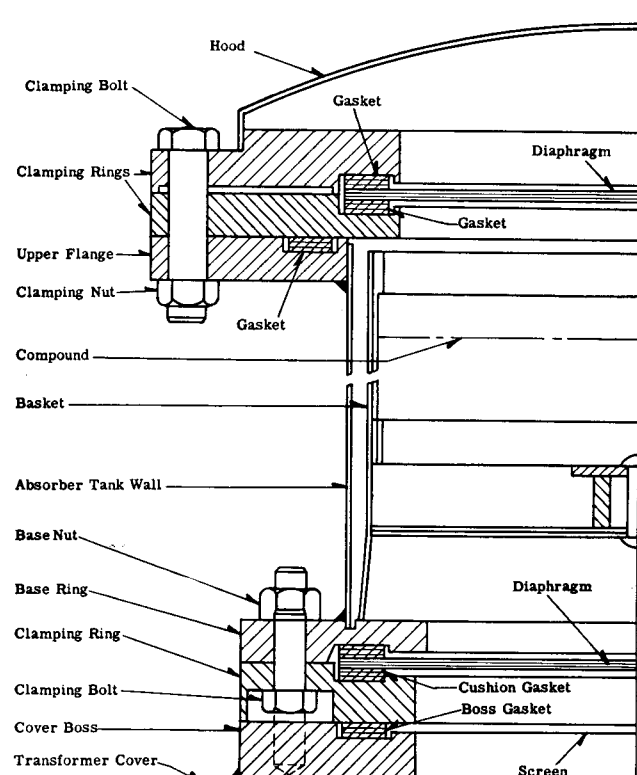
CROSS SECTIONAL VIEW, ROUND TYPE, FLAT COVER BASE
